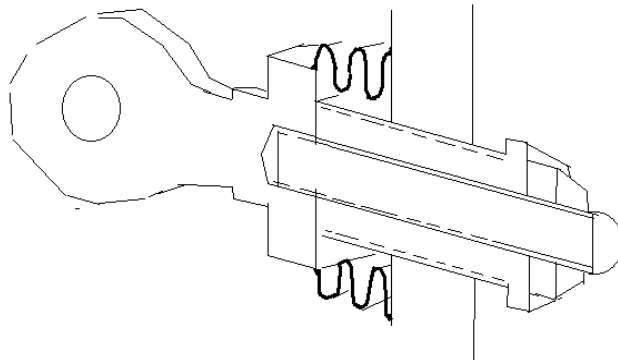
Adjustment detail at the end of the strut. Bellows maintains vacuum during adjustment.
